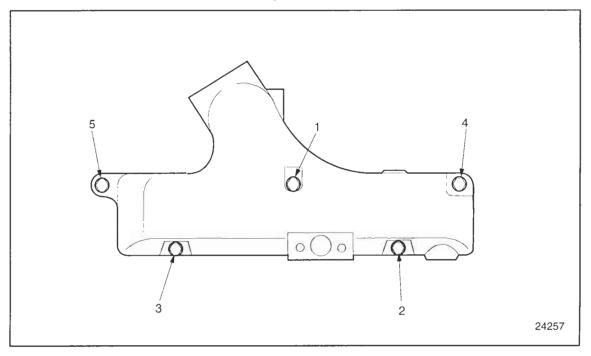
Intake Manifold Bolt Tightening Sequence
